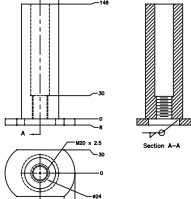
A. A full section view of the mechanical part shown in Figure 5-15, revealing the internal features (a hole and a slot) to illustrate how a full section view makes the shape of the object more understandable.
